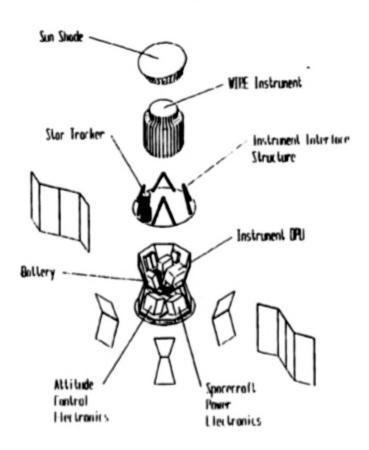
AN EXPLODED VIEW OF THE WIRE INSTRUMENT AND SPACECRAFT
